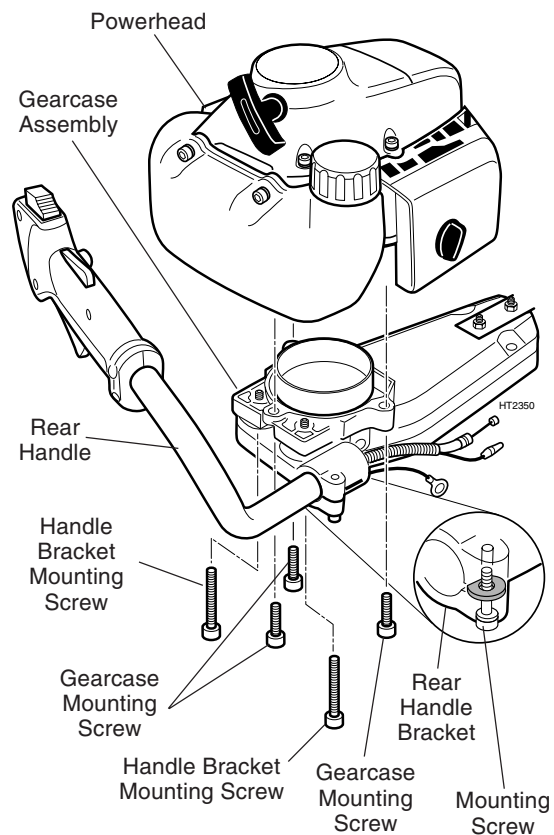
Removing the Gearcase Assembly and Rear Handle Bracket
